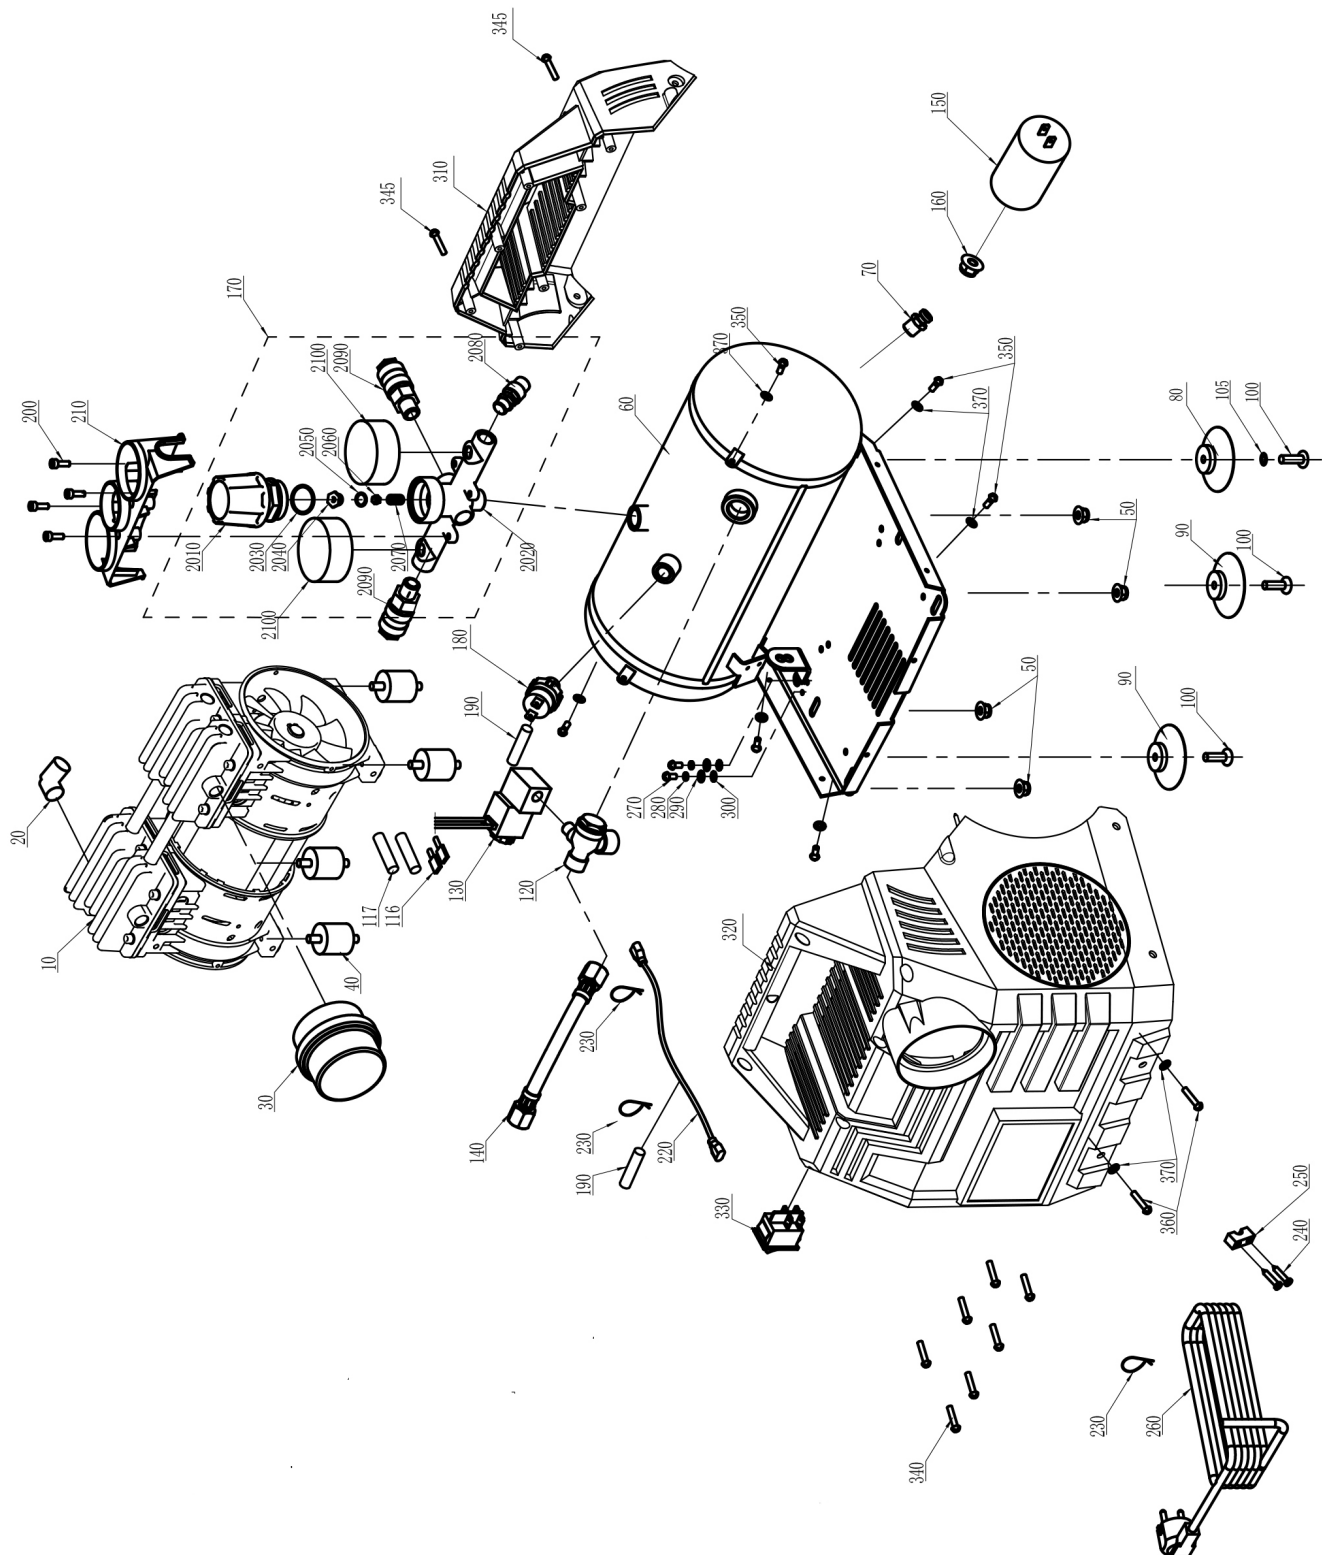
Spare parts drawing 1 - AIRBOY 131 OF E
